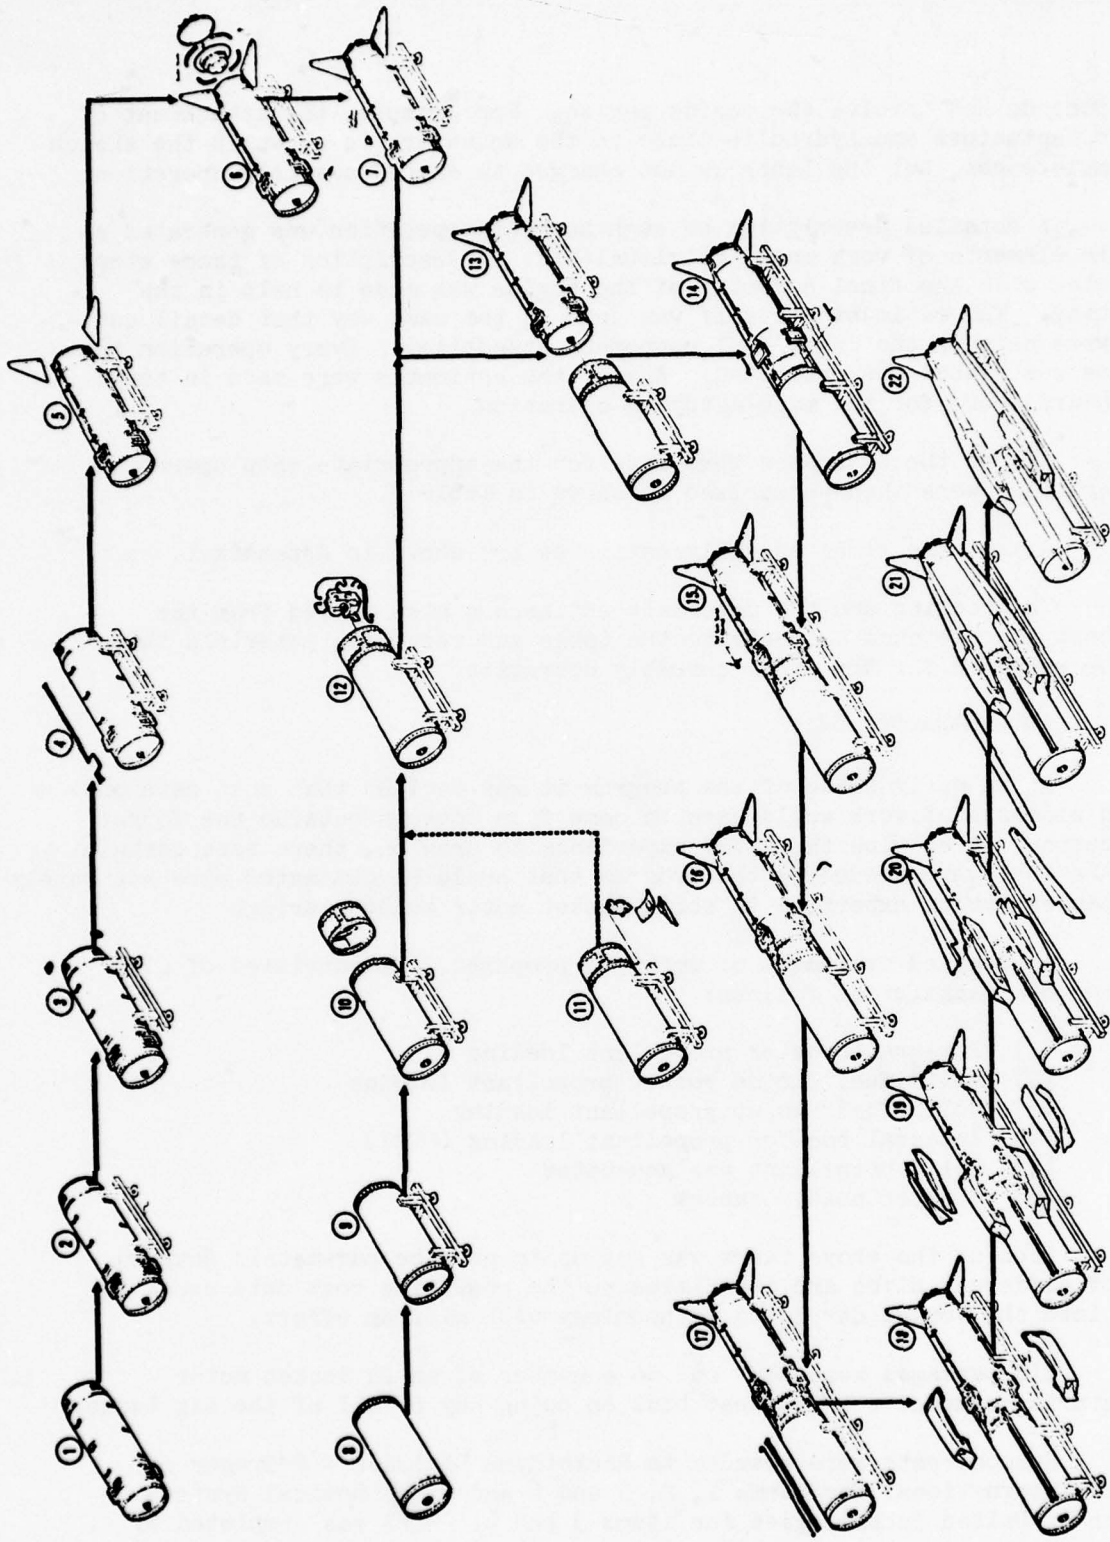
LIQUID FUEL RAMJET - IRR - FINAL ASSEMBLY
